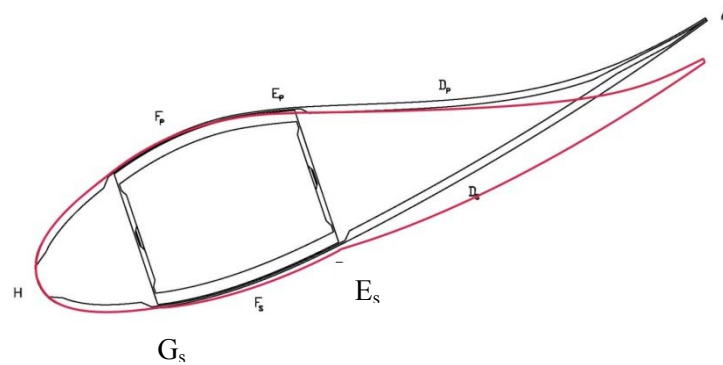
Sketch of the 16m section showing the blade deformation at 55% Risø load.
